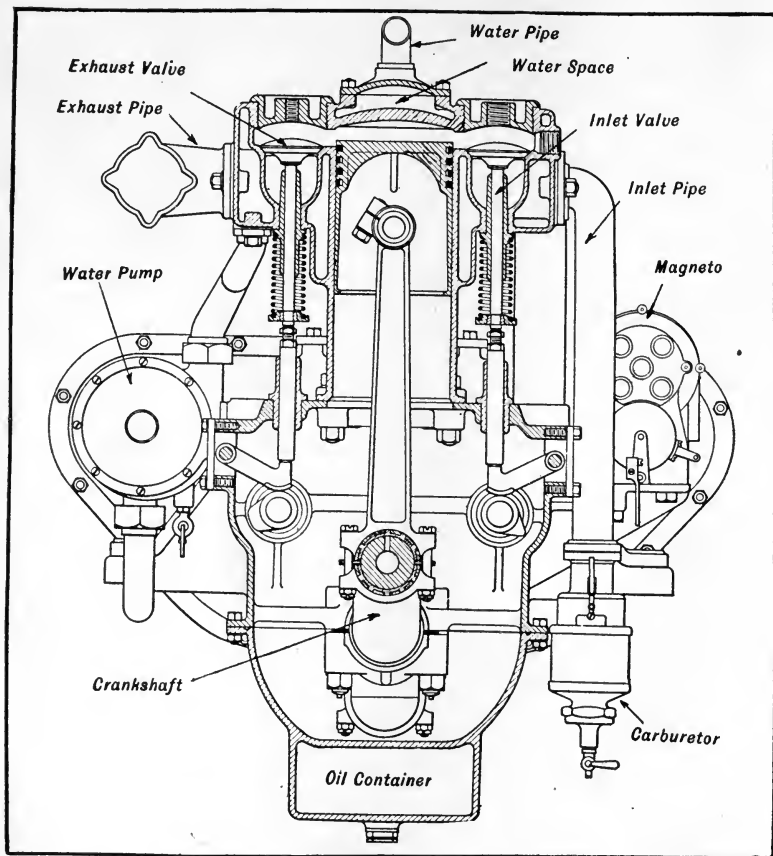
Sectional View of Rear Cylinder of Gasoline Engine with Important Parts Indicated.
